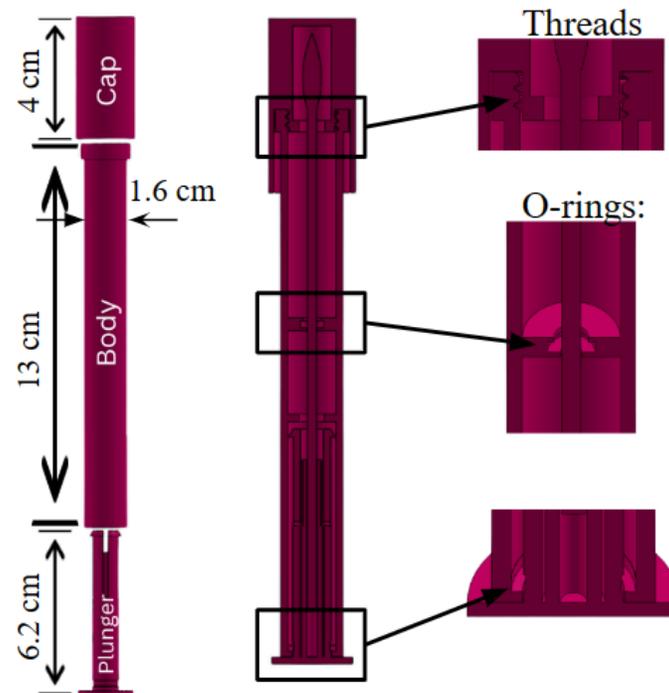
Modified plunger design with the cap, body, and plunger shown. A section view of the entire design with the threadings for the cap attachment on the interior of the body and two o-ring insertion sites indicated.
